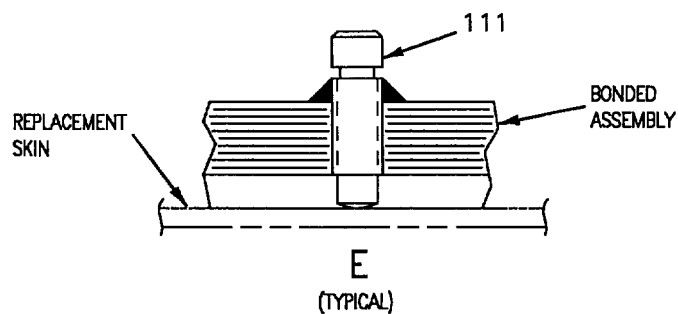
Installation of Plate Set for Drilling 74A180756 Skins (Sheet 4)
